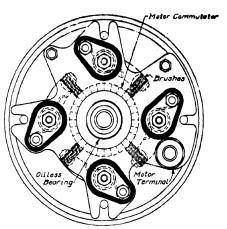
End View of Delco Starting Motor, Showing Commutator and Brushes
